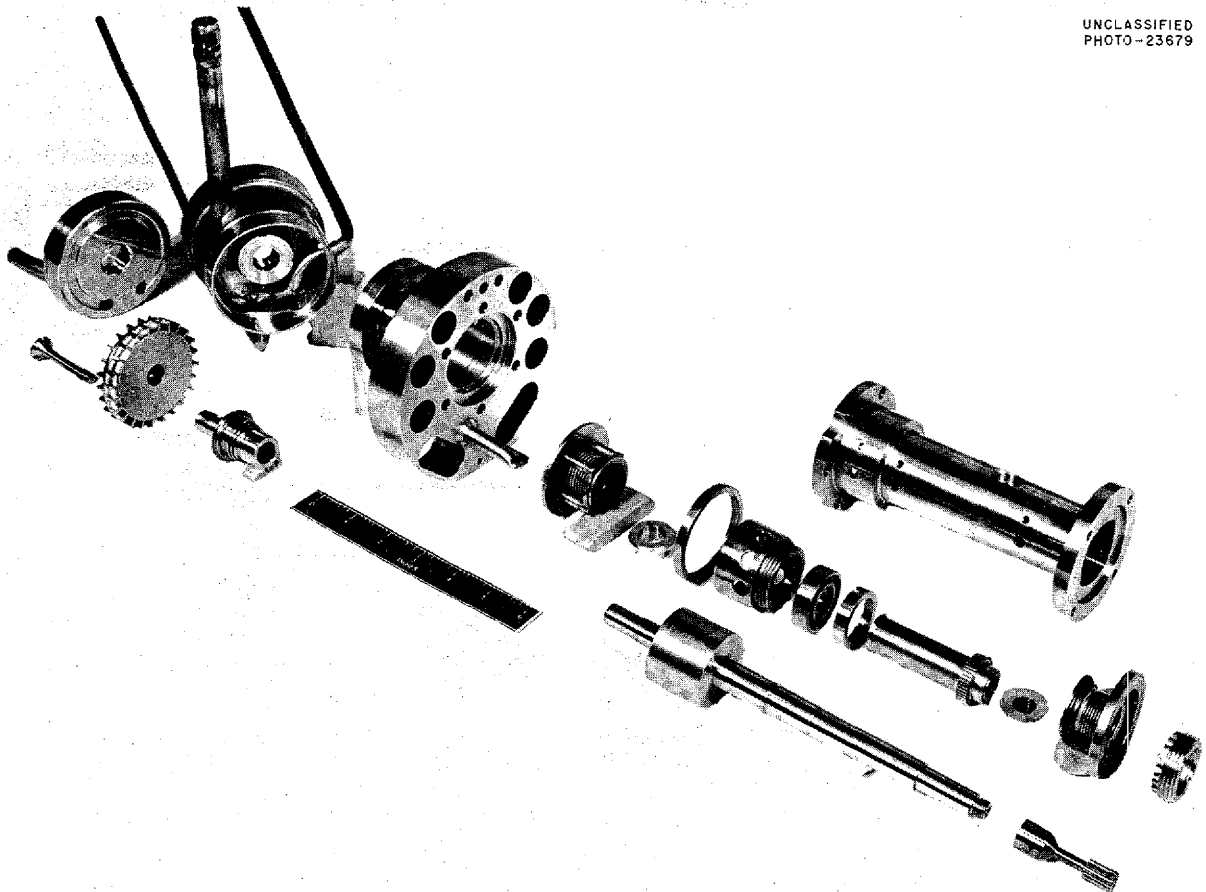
Exploded View of Pump to Be Used for MTR In-Pile Loop No. 1.
